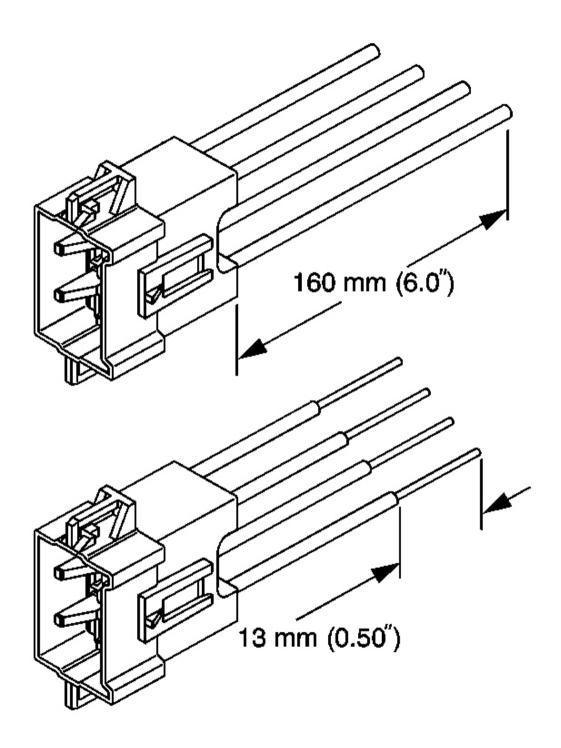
Measuring SIR Wire To Connector Courtesy of GENERAL MOTORS CORP.
